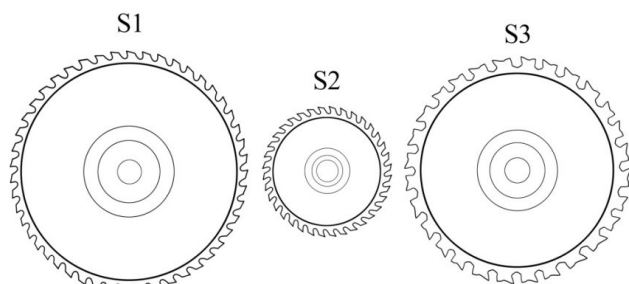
Saw blades used in the tests: (S1): 48-tooth saw blade; (S2): 36-tooth saw blade and (S3): 28-tooth saw blade.
